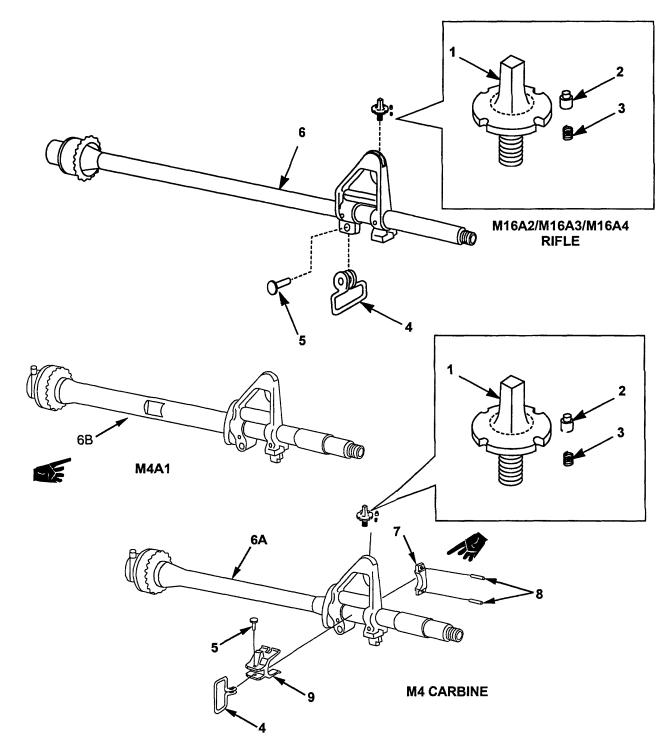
Barrel Assembly (M16A2, M16A3) 9349124, Barrel Assembly (M16A4) 12598107, Replacement Barrel and Front Sight Assembly (M4) 9390007 and Barrel Assembly (M4A1) 12991850
